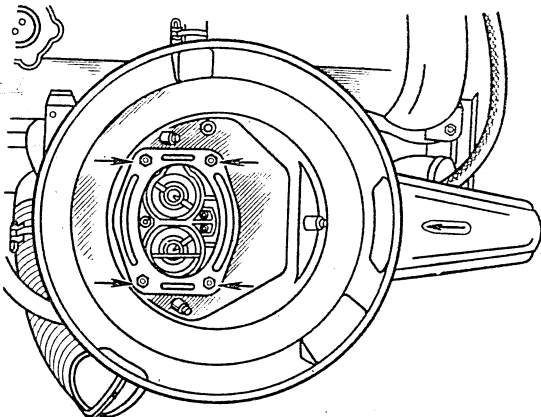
Removing the Air Cleaner. Arrows Show Cleaner-to-Carburettor Fastening Nuts
